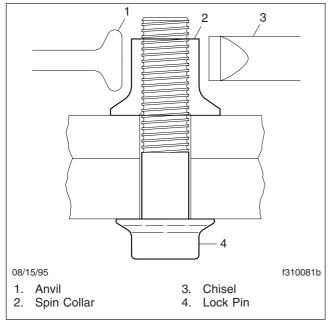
, Huck-Spin® Fastener Removal with a Chisel
